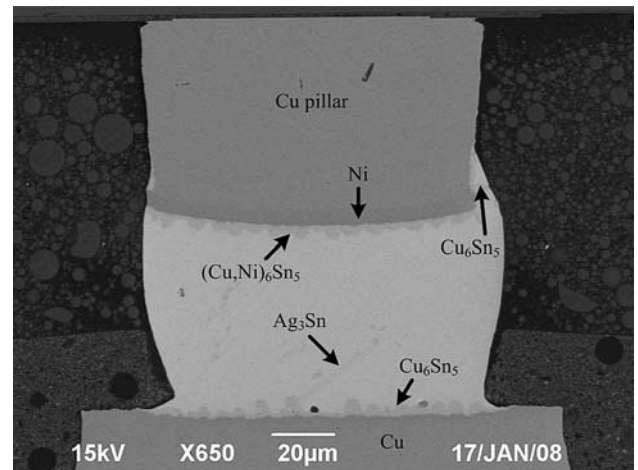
Cross-sectional view of an as-assembled Cu pillar solder joint.
